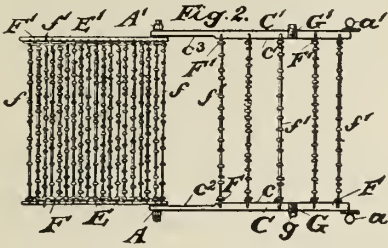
is a view of the support in side elevation showing the position of the chain thereon. Fig. 2, is a top plan view, partly in section. Fig. 3, is an enlarged view in detail, in side elevation of the supporting rails; and Fig. 4, is a top plan view of the same.
